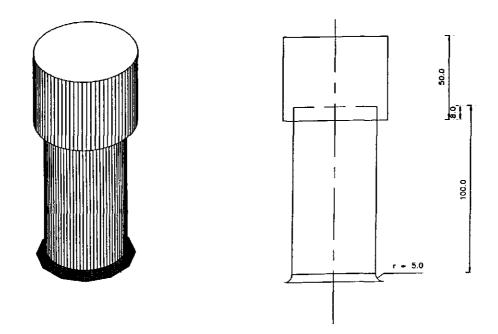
View and cross section of exhaust chimney with flowguider at inlet.
